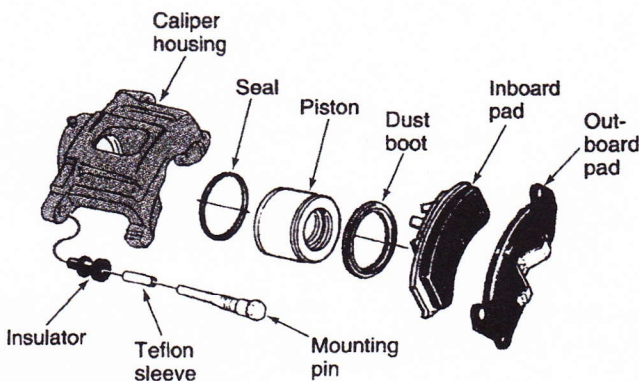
Ford/Kelsey floating caliper disc brake.
